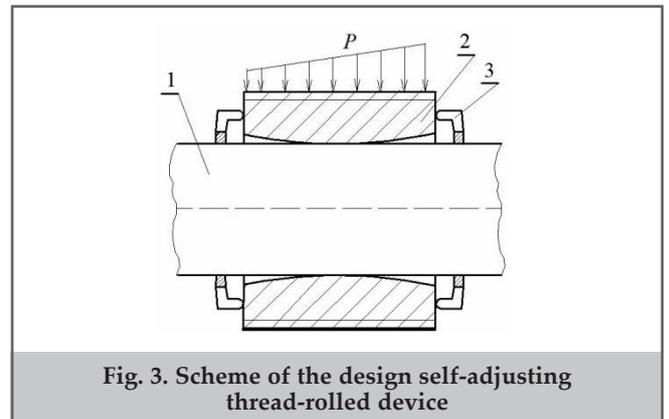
Scheme of the design self-adjusting thread-rolled device
